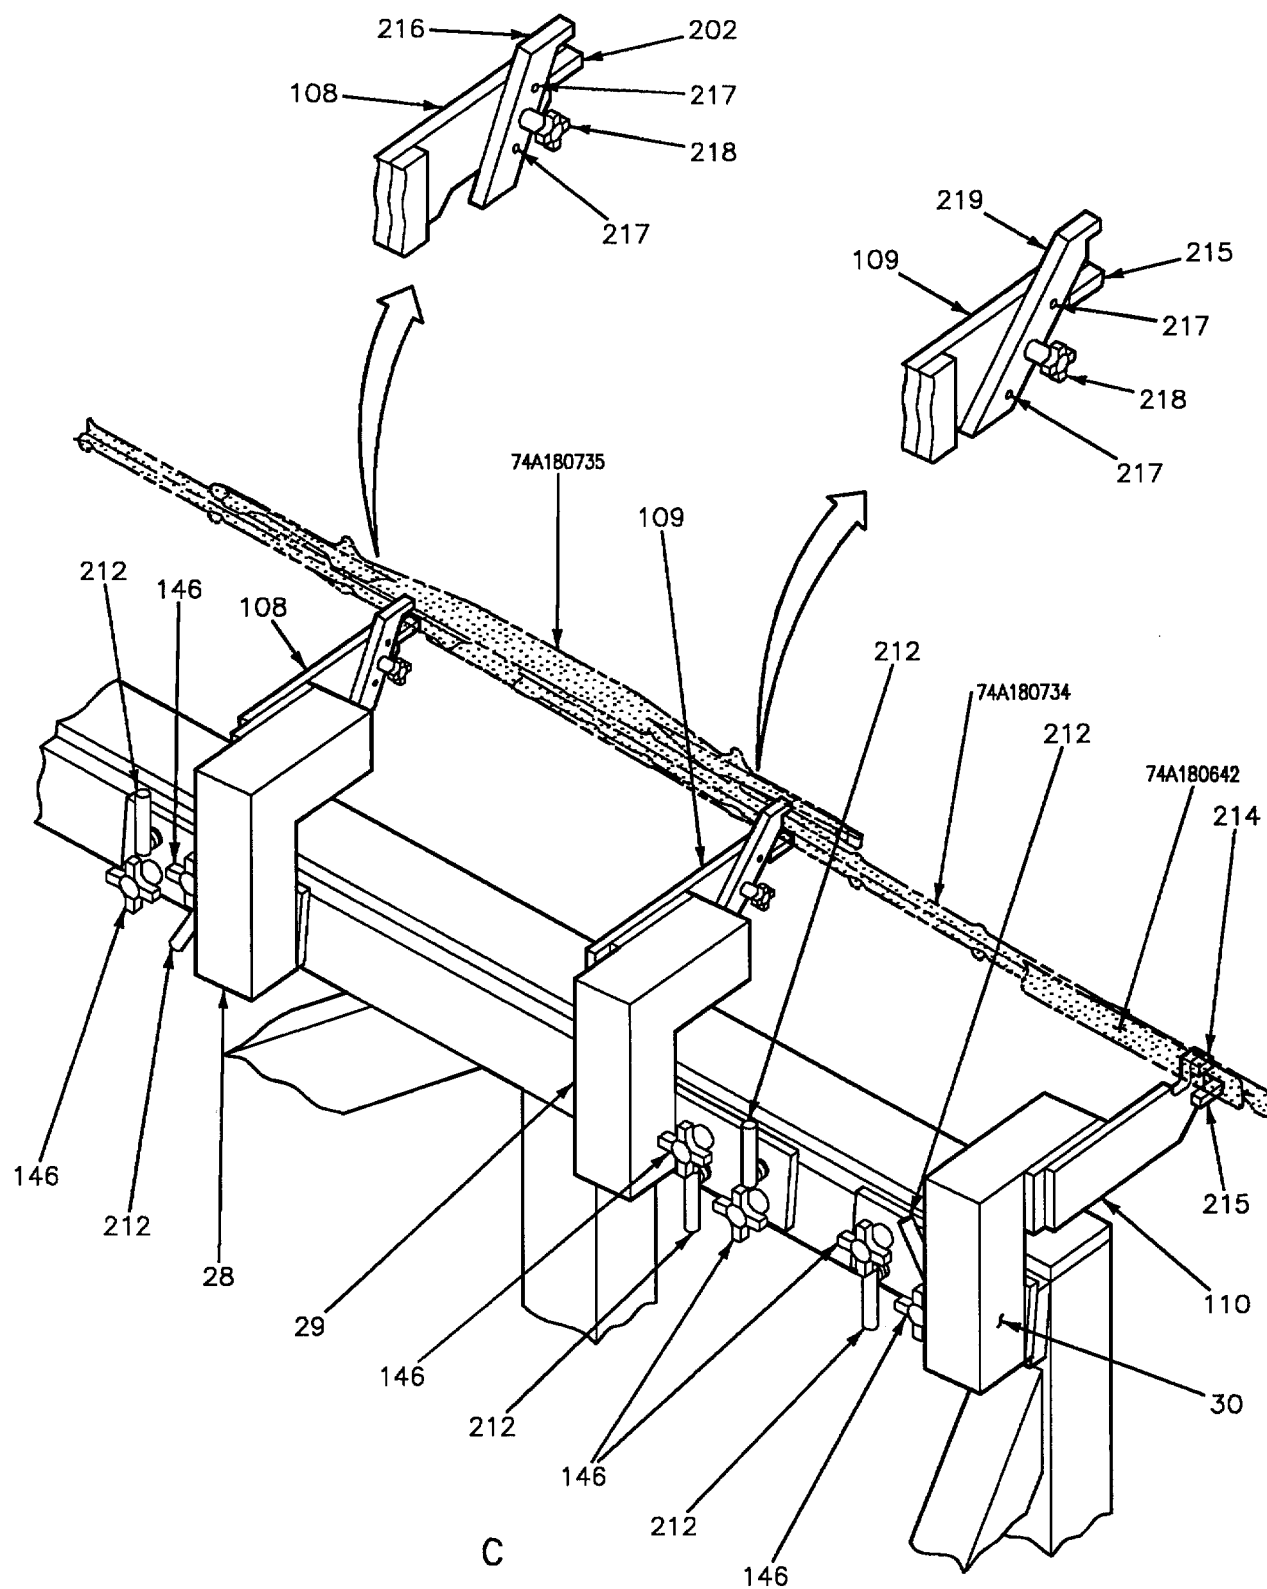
Stringers, 74A180642 and 74A180734 (Sheet 4)
